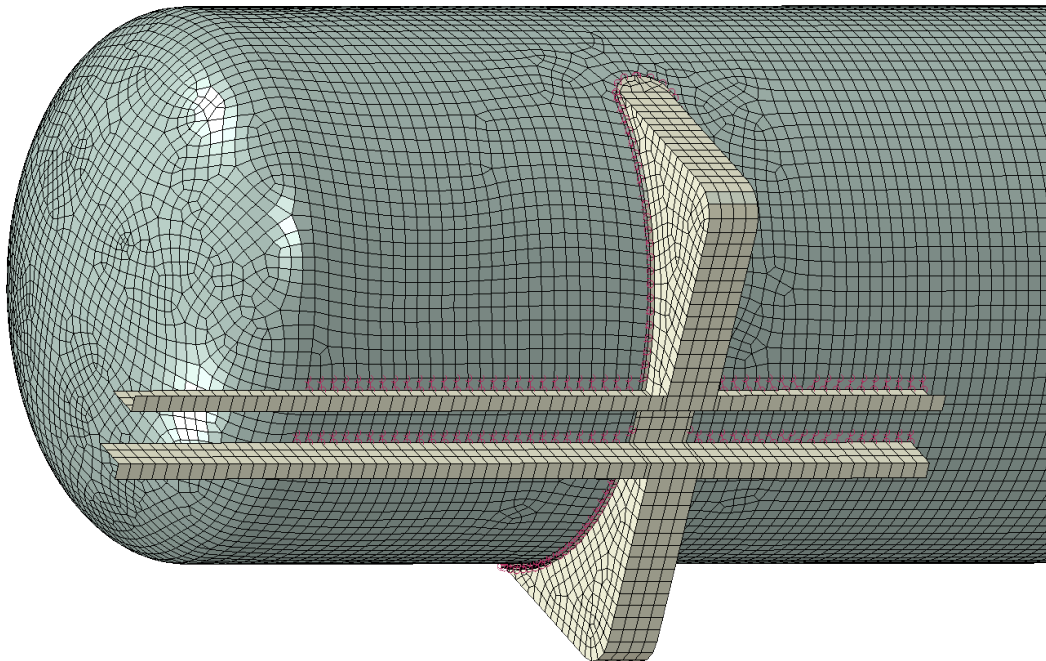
Tied Constraint between East End Bolster-Stub Sill and Outer Tank (Bottom View Only Showing Tied Parts)
